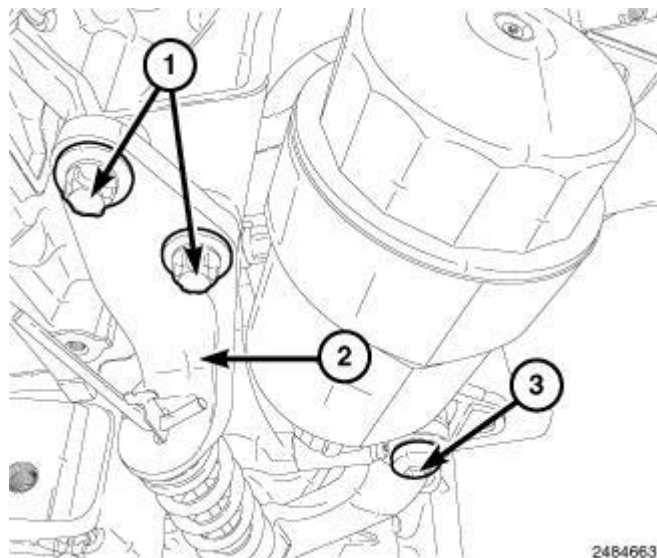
Lock Tabs & Engine Wire Harness
